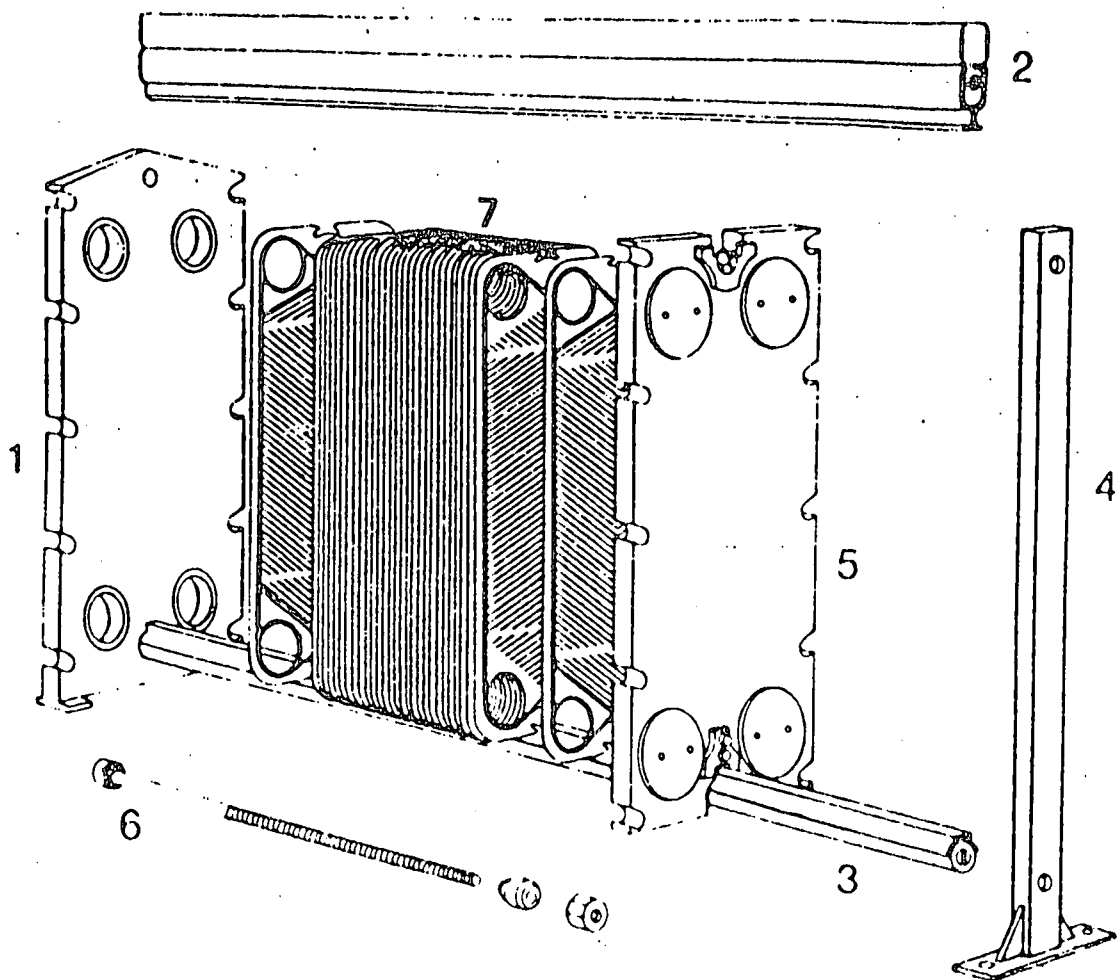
Exploded view of a Gasketed Plate Heat Exchanger
